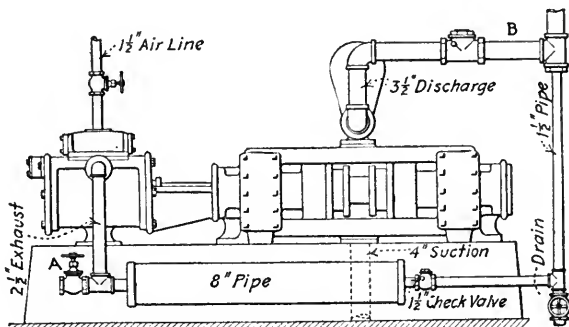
PUMP EXHAUSTING INTO DISCHARGE COLUMN.
